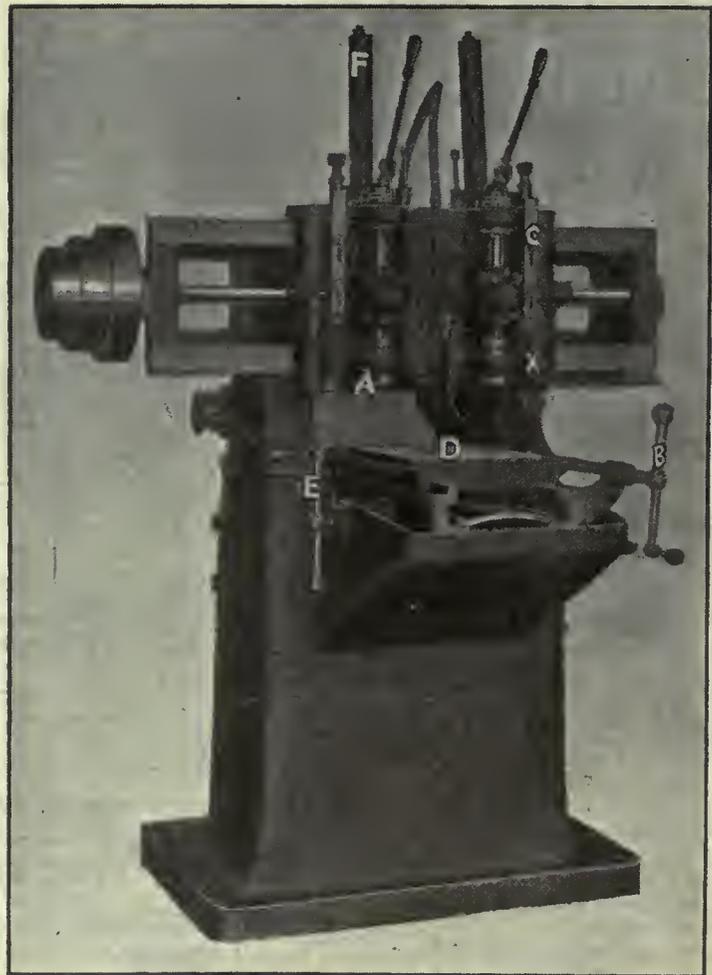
TYPICAL EXAMPLE OF TWO SPINDLE MACHINE.
